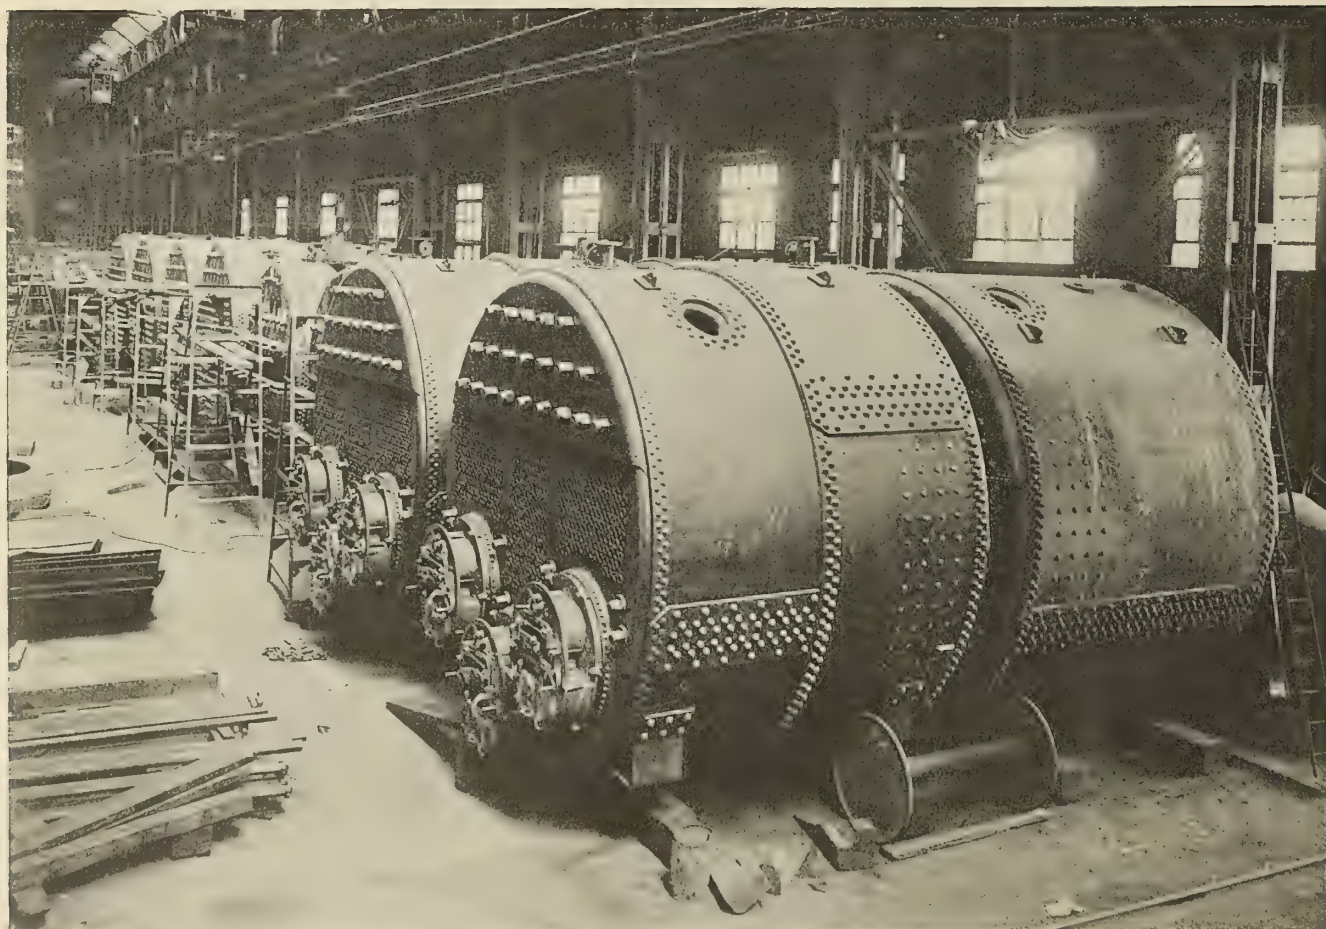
Scotch Boilers on Testing Floor, Boiler Shop, North Yard
